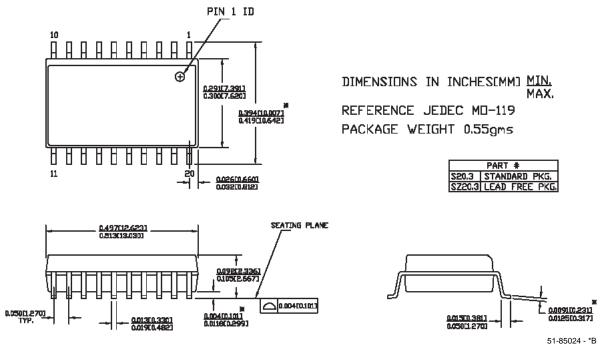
20-Lead (300-Mil) Molded SOIC
